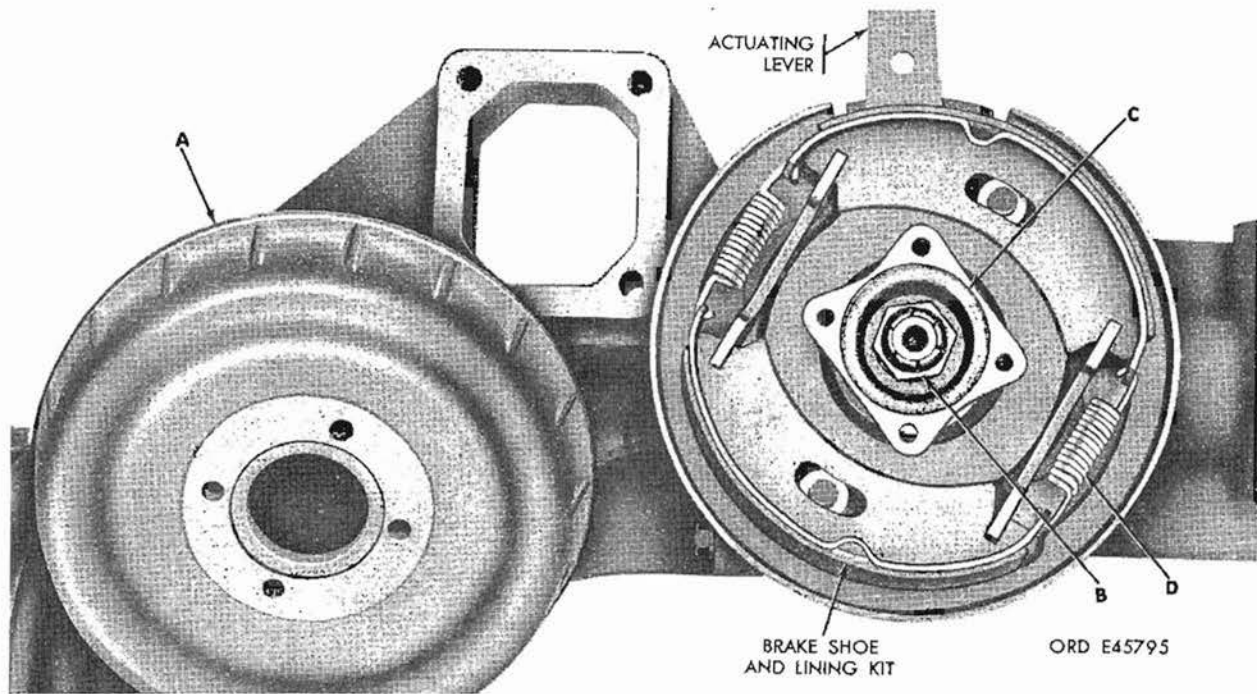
Removing or installing brake band assembly and associated parts - M274.
